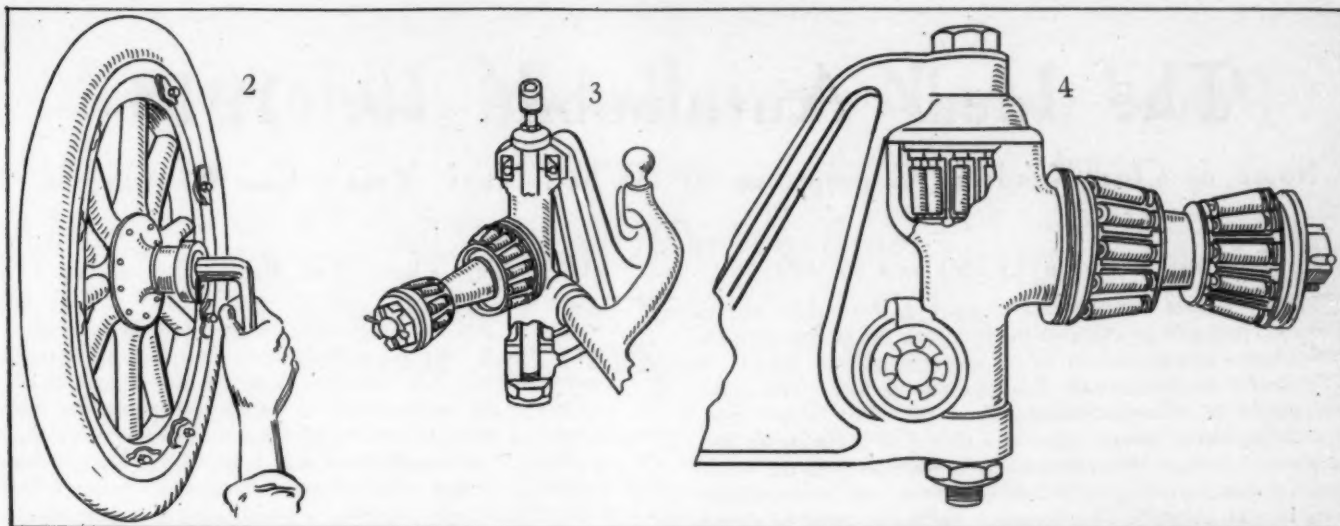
Removing hub cap. Fig. 3—Roller bearing for wheel with ball-bearing knuckle. Fig. 4—Full roller bearing, knuckle and wheel
